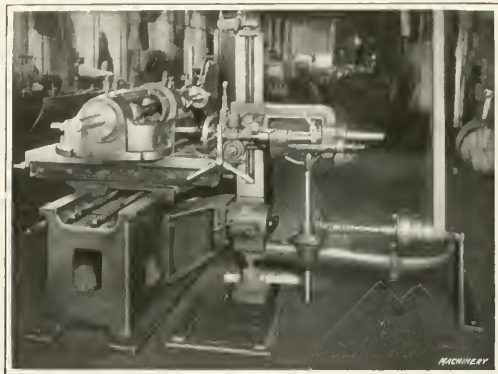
Arrangement of Lucas Boring Machine and Barnes Drill for machining Holes in Saddle
